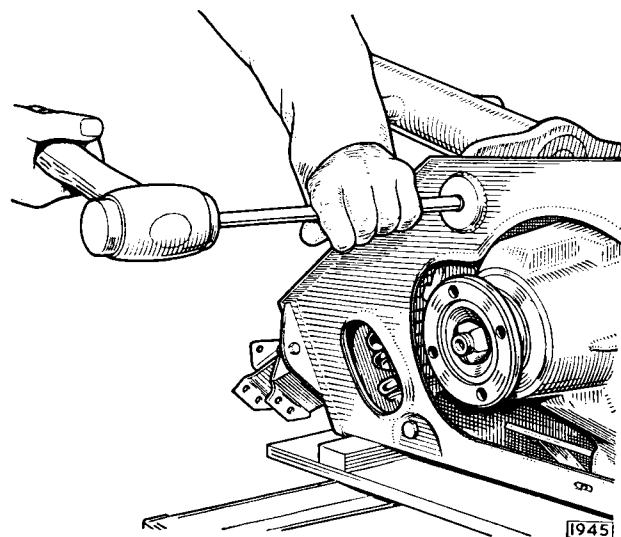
Drifting the inner fulcrum shaft into position and displacing the dummy shafts
